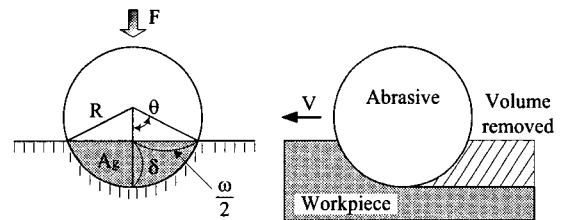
Schematic of the interaction between a single abrasive and a workpiece
